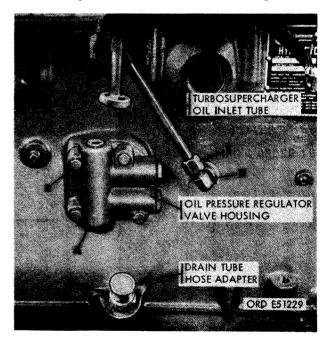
INSTALLING OIL PRESSURE REGULATOR VALVE HOUSING, TURBO-SUPERCHARGER OIL INLET TUBE, AND OIL DRAIN TUBE ADAPTER (LATE MODEL ENGINES).
